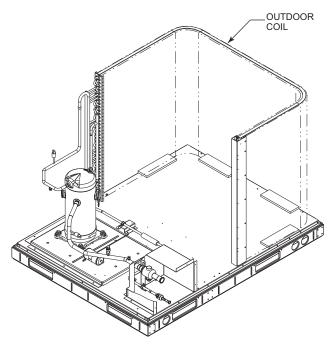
Typical Interior, Single-Circuit Unit (CAS090, 091 shown)
